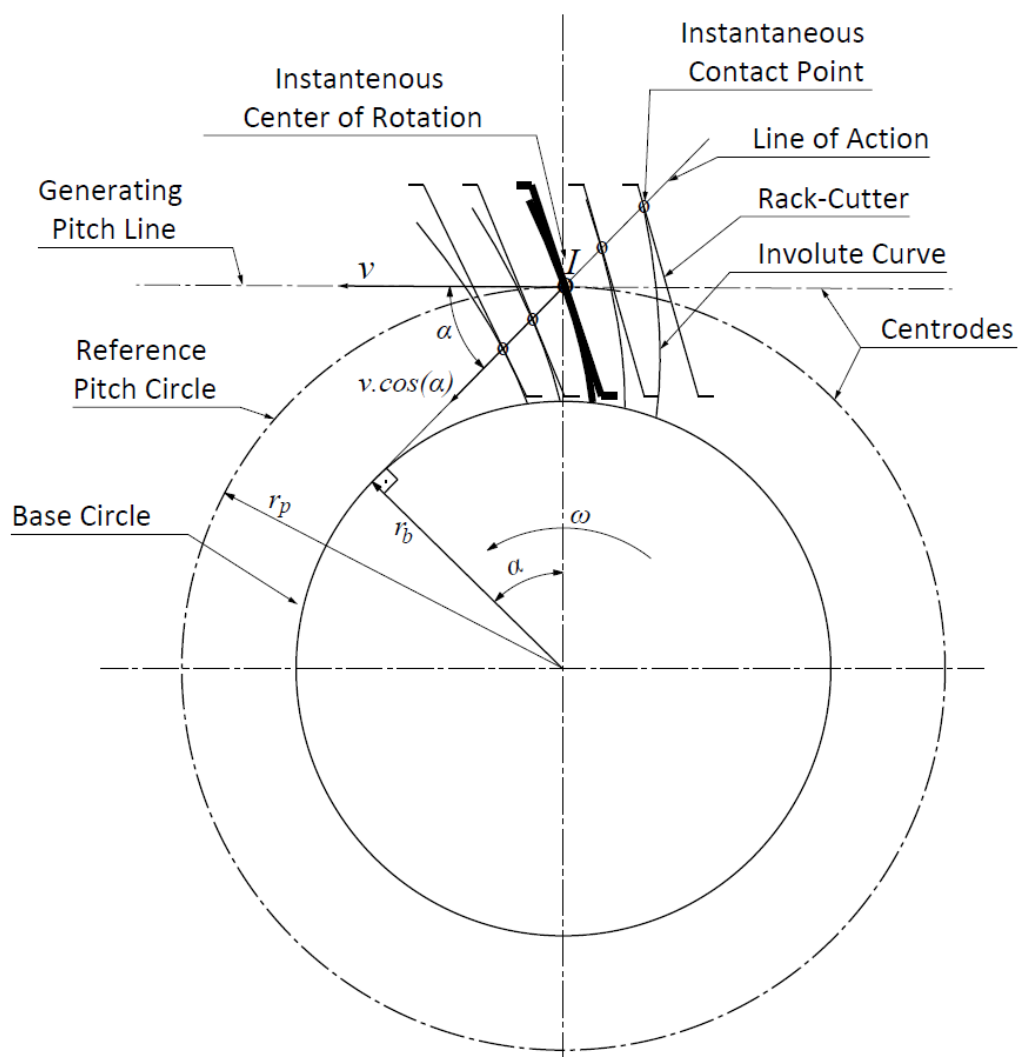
Generation of external gear involute flank surface by the inclined surface of the rack-cutter
